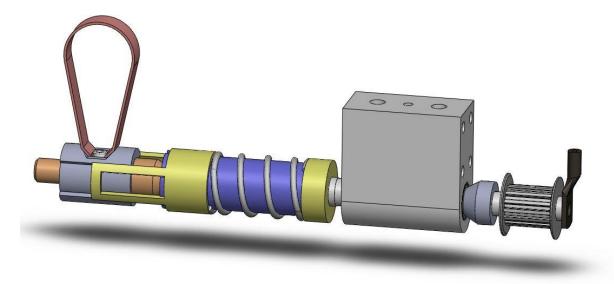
Compact version of the EDM-tool, not equipped with the brake system and with current supply at the end of the driving shaft.
